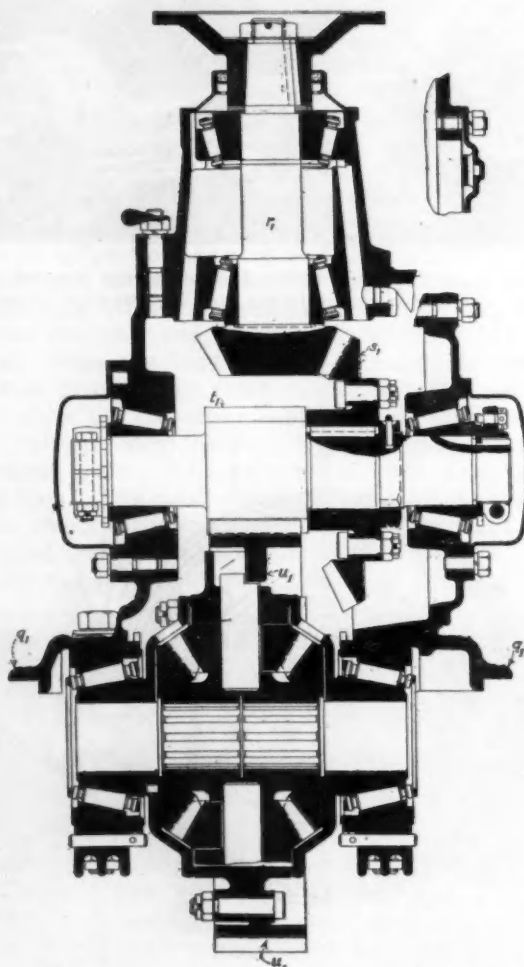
SECTION THROUGH THE DOUBLE REDUCTION OF THE SAME AXLE AS ILLUSTRATED IN FIG. 26
